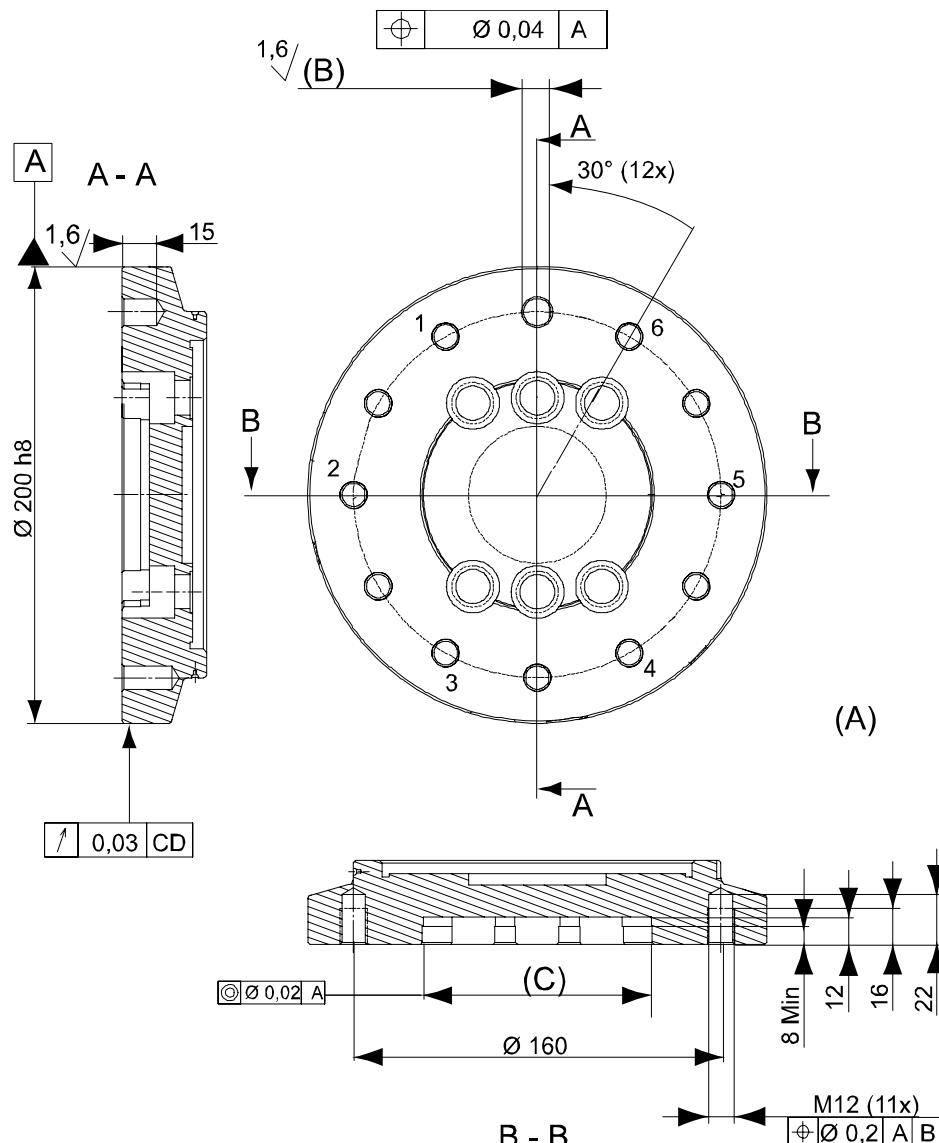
Robot tool flange SS-EN ISO 9409-1:2004 (dimensions in mm).
